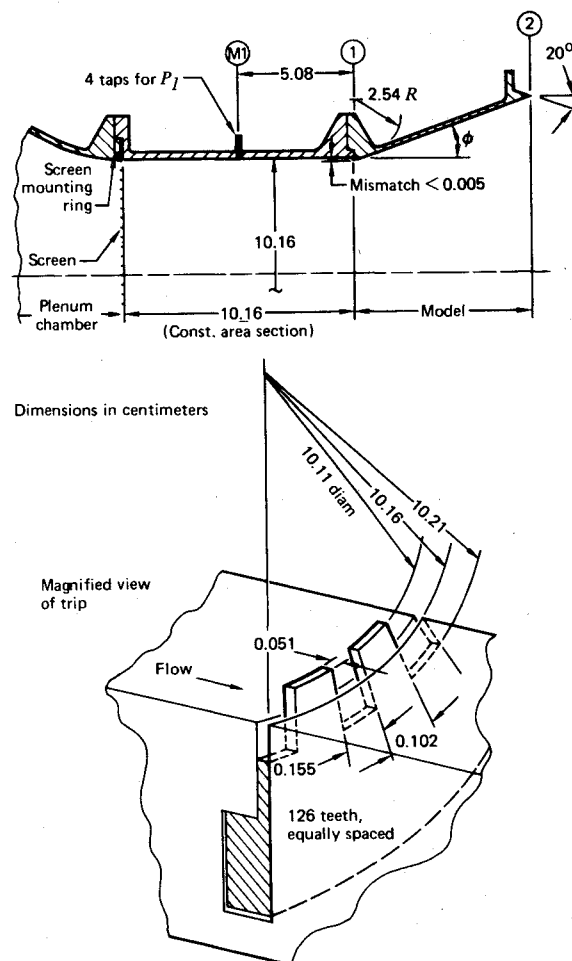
Details of diffuser model mounted on test facility. Trip shown at bottom was used to generate profile 1.
